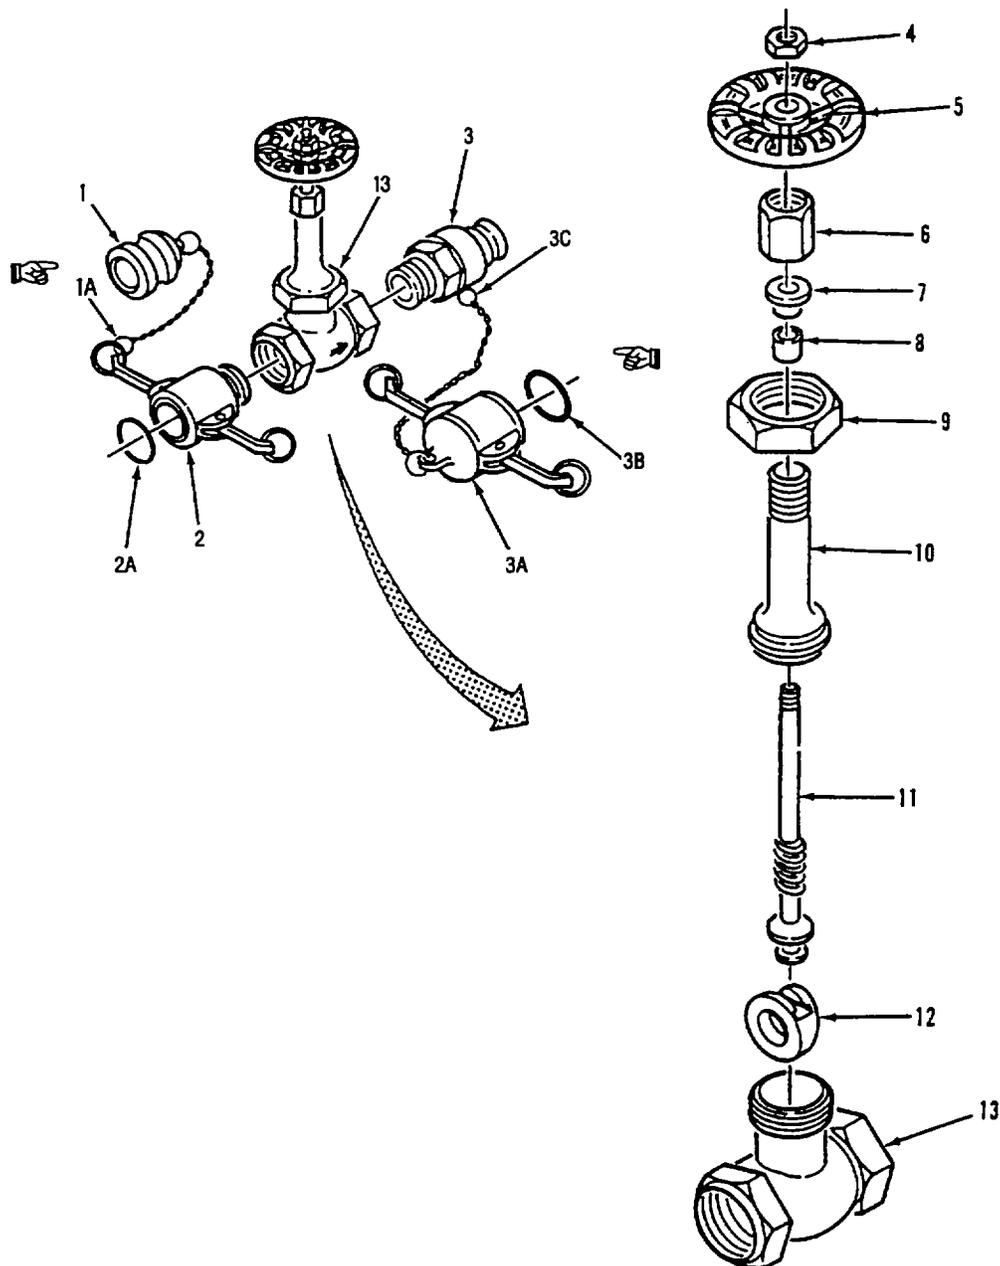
Gate Valve Assembly (2-Inch) Repair
